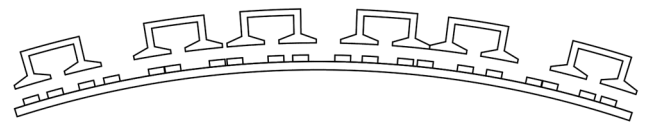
APMG with stator core modules and rotor magnets positioning tolerances according to the non-UUM.
